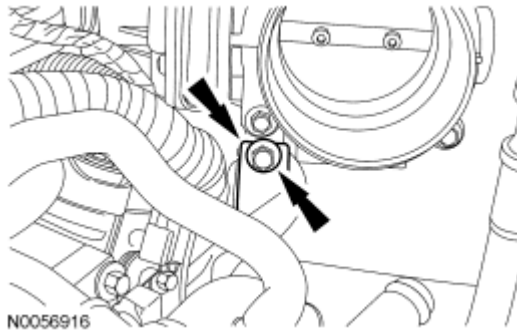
Identifying Upper Intake Manifold Support Bracket & Bolt
